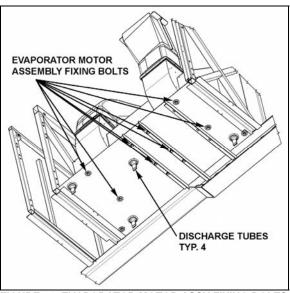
EVAPORATOR MOTOR ASSY FIXING BOLTS
